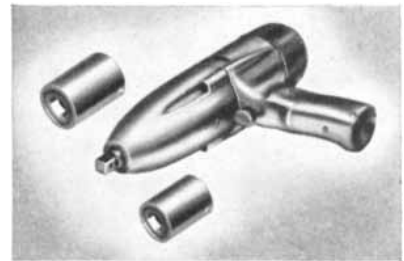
R. J. Williams power socket wrench uses carbide inserts in sockets.
